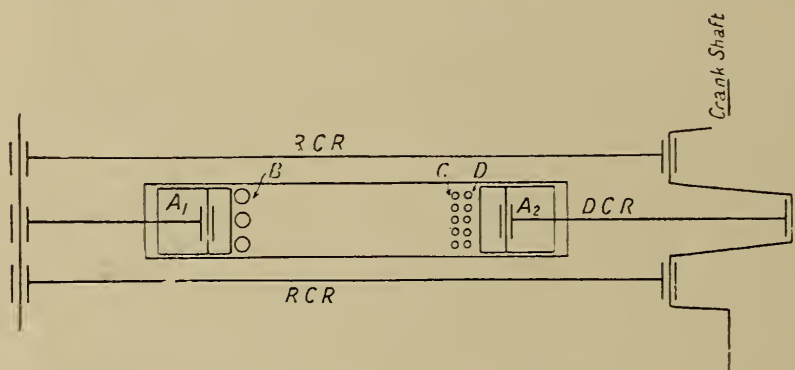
Diagram of Oechelhauser Engine. *D C R* direct Connecting Rod ; *R C R* two Return Connecting Rods ; Air enters by Holes at *C* ; Gas at *D* ; Exhaust leaves at *B*.
